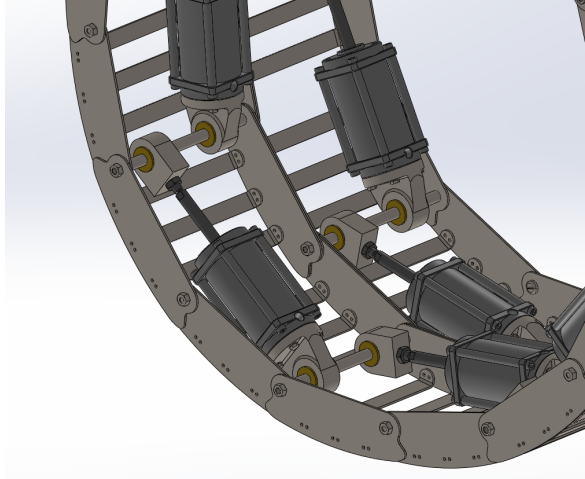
Detailed view of the assembly, showing shafts, spacers, and bearings.
